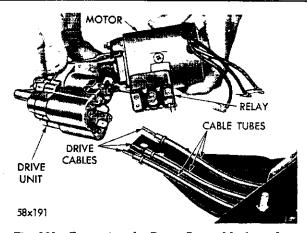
Removing the Drive Assembly from the Left Slave Unit (Typical)
